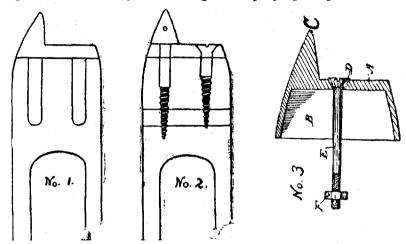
is a side view of one end of the shuttle, showing the tip in place; Fig. 2 is a plan view thereof; and Fig. 3 is a sectional view of the cap removed, showing the bolt by which it is secured. The inventor in his specifications states that—
